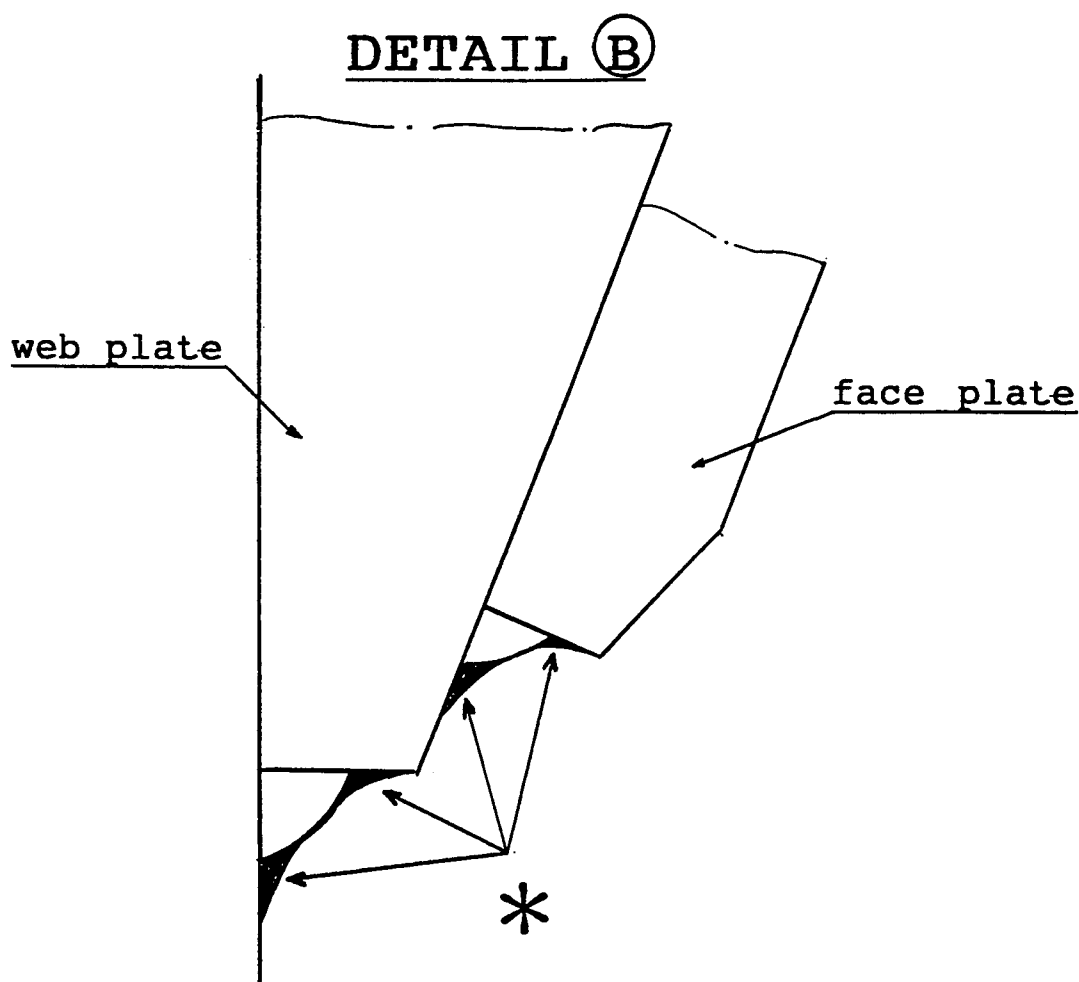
Dressing bead on fillet weld at the edge of hold frame.
